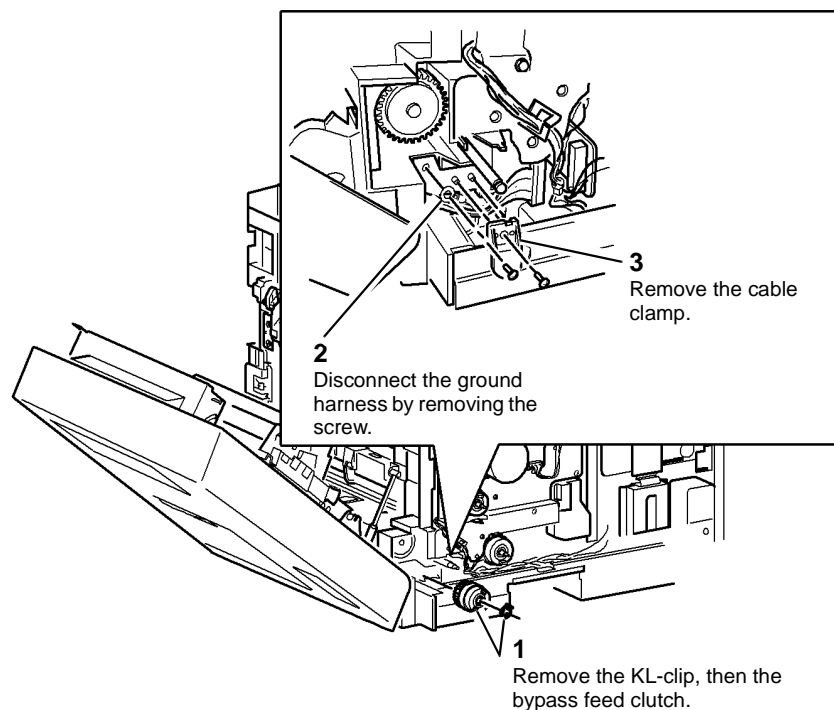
Removing the Bypass Feed Clutch and Cable Clamp
